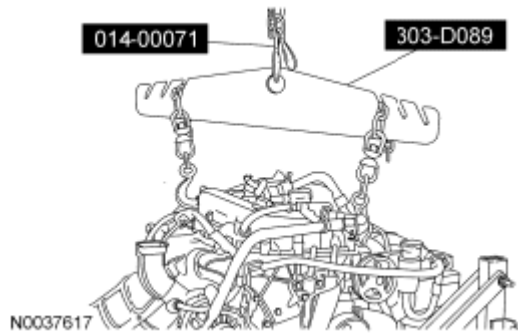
Identifying Heavy Duty Floor Crane And Spreader Bar
